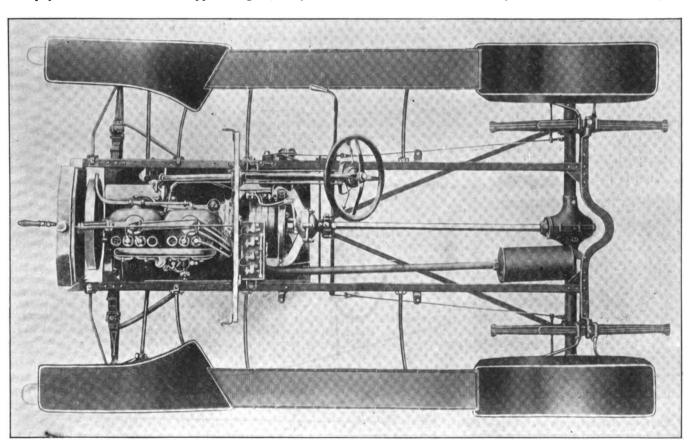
A TOP VIEW OF THE FORD CHASSIS USED FOR THE MODEL S ROADSTER
